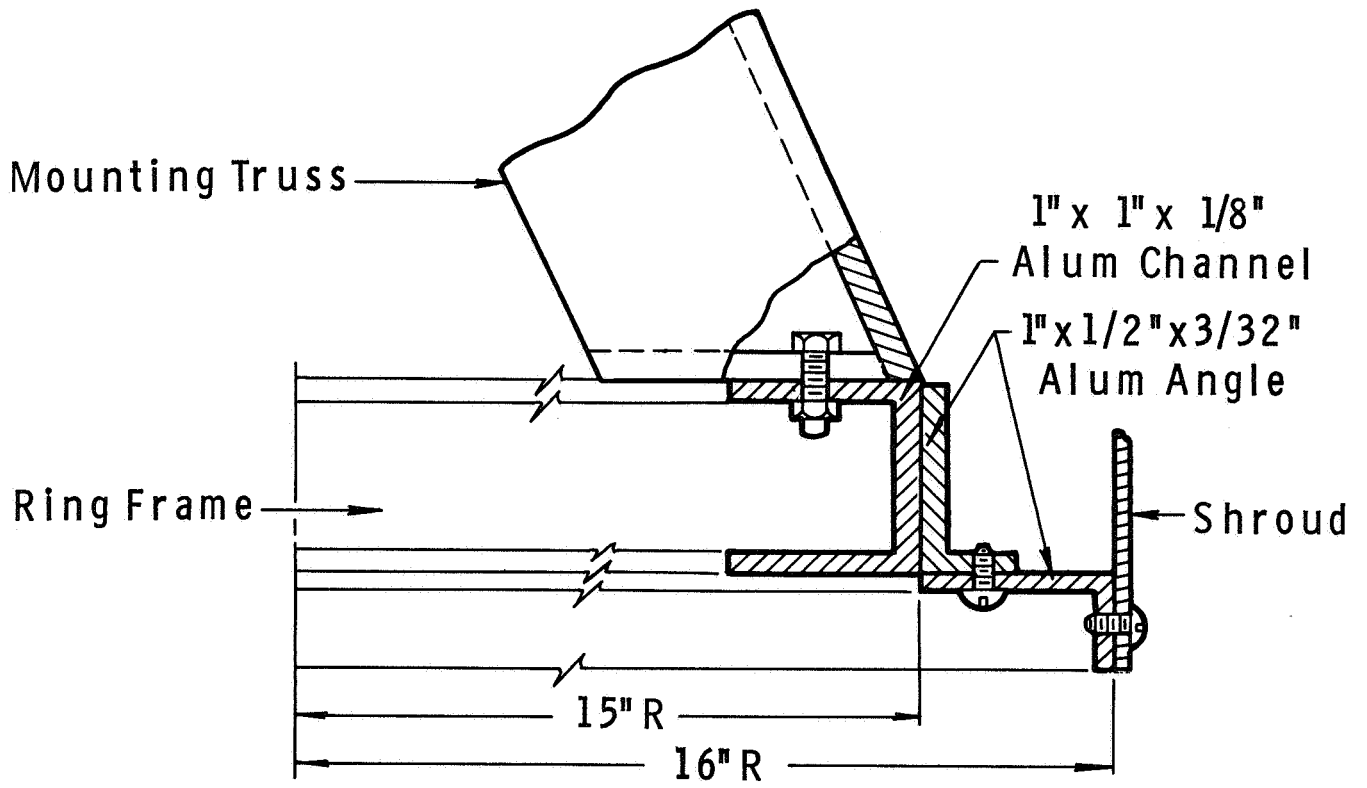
MOUNTING DETAIL NO.1 - RING FRAME
